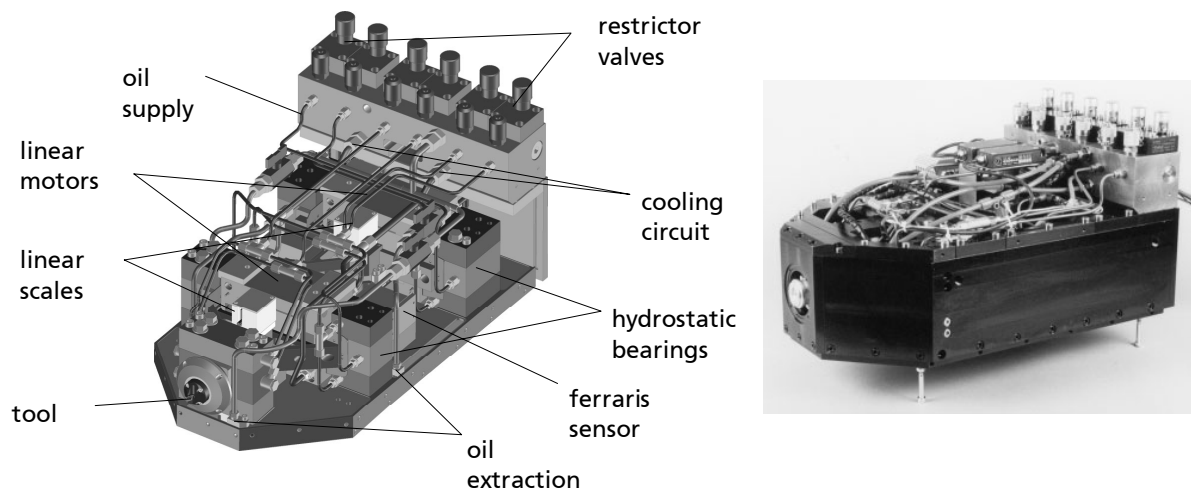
Design of hydrostatic guided Fast Tool Servo System
